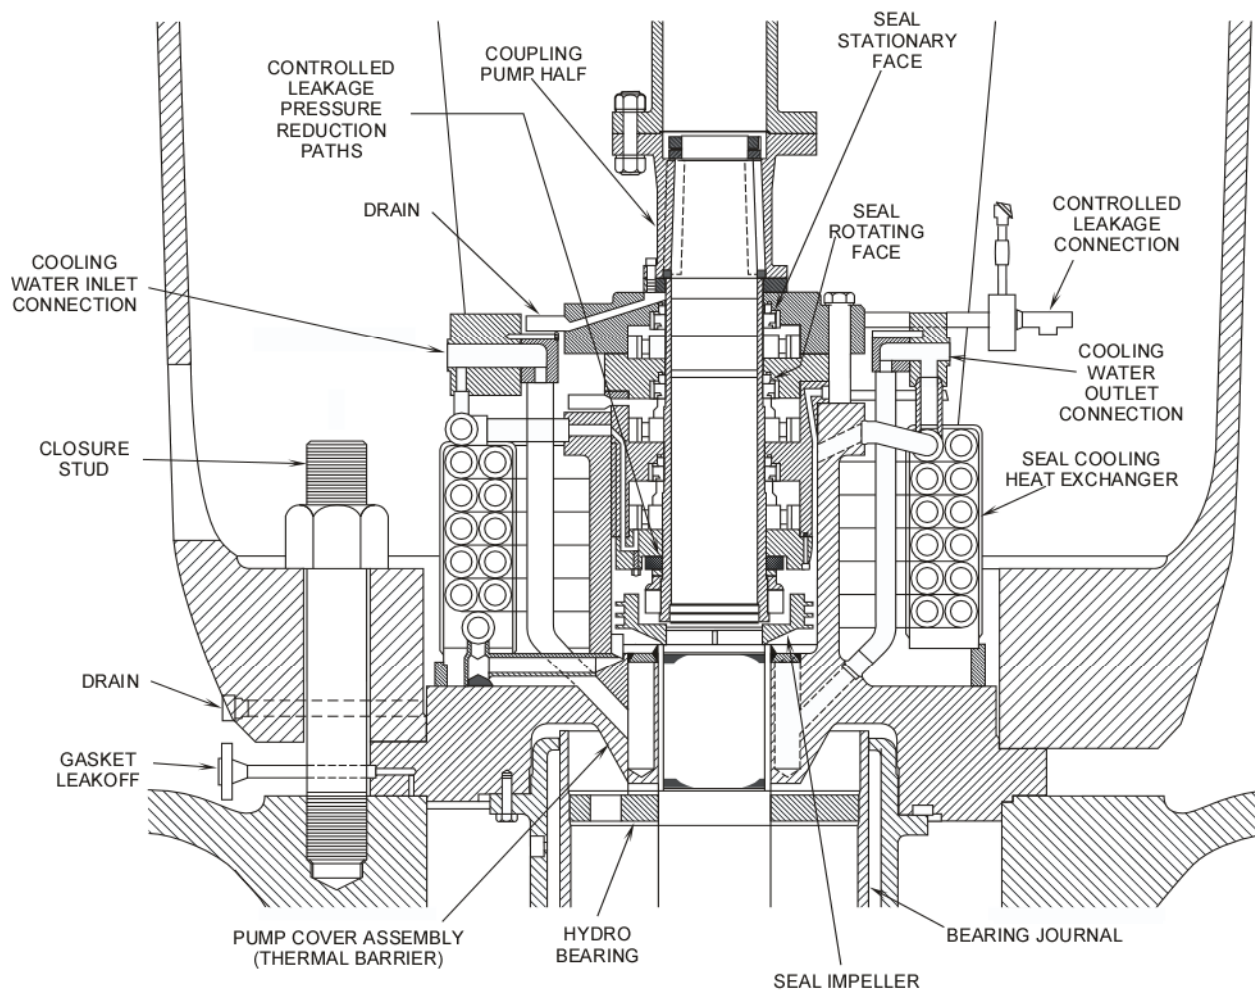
Reactor Coolant Pump Seal Assembly
